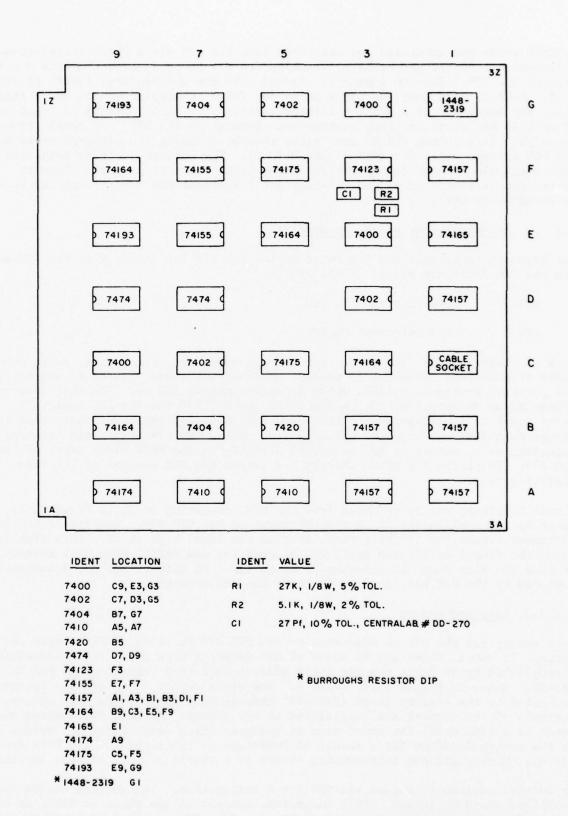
CIE Ancillary Board, Parts Layout Diagram and Parts List
